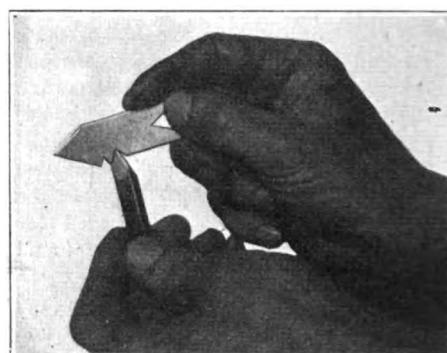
Testing Shapes of Thread Tools With Center Gage.
